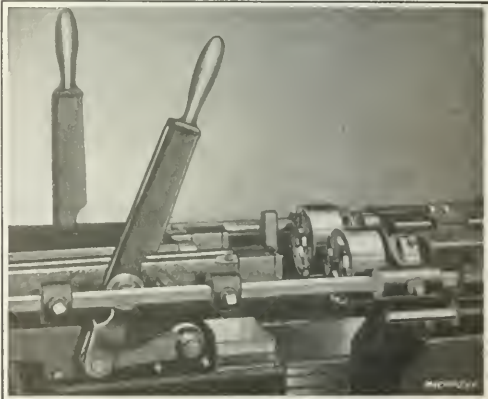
Threading Dies and Feed Mechanism on Machine shown in Fig. 5
